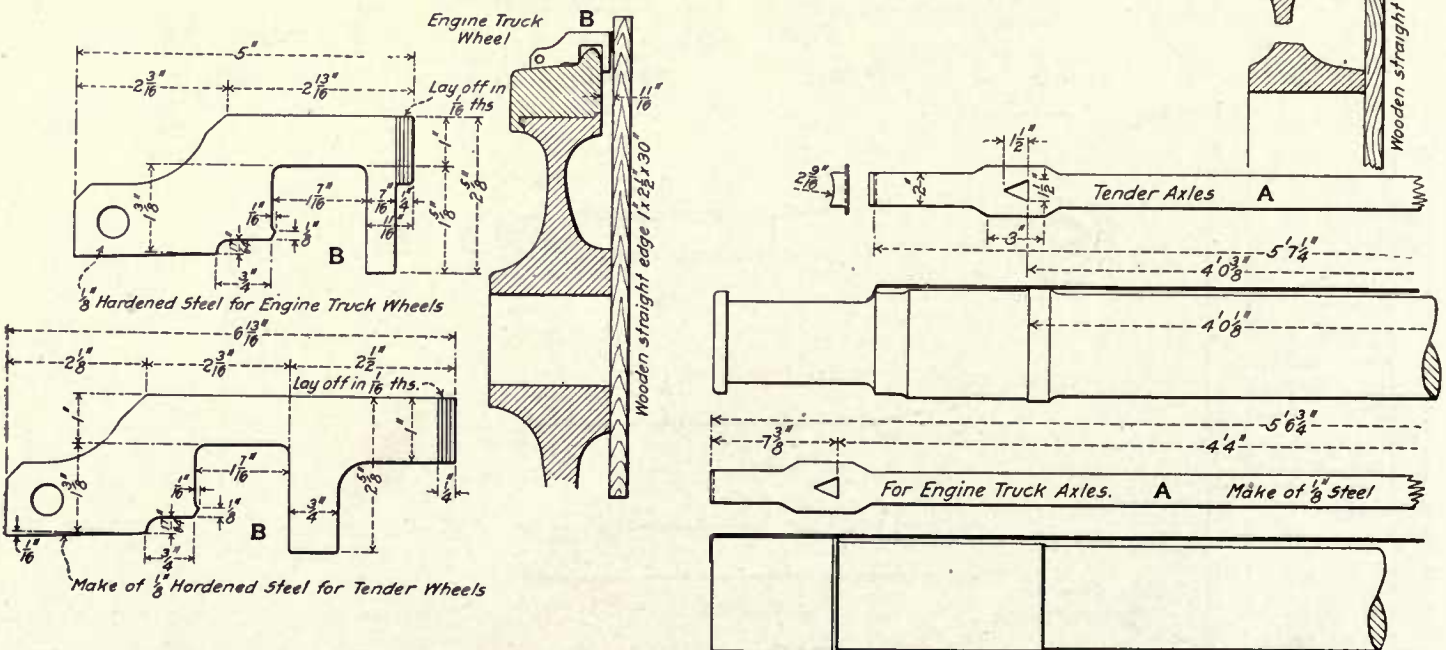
Gages for Mounting Engine and Tender Truck Wheels.
